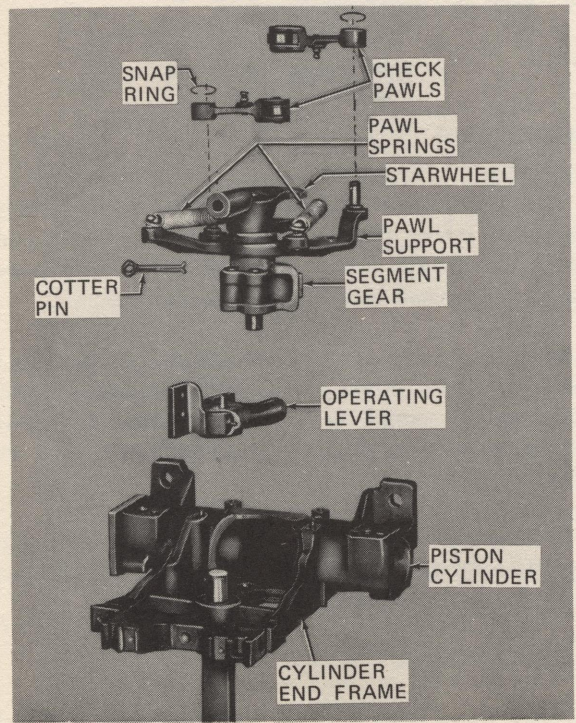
EXPLODED VIEW OF DRIVE MECHANISM PARTS.
